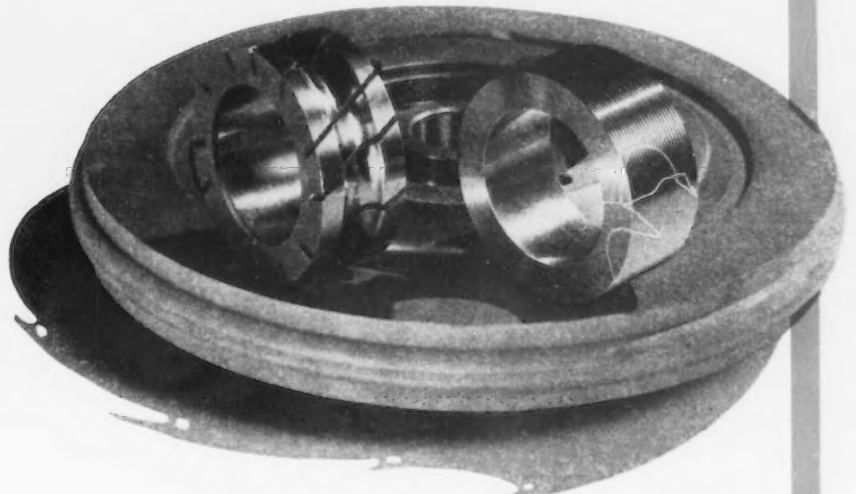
A properly formed fine grit wheel, 14 in. diam with a face width of $1\frac{1}{4}$ in. The form is a dual ball race. Crush forming solved a problem by reducing wheel dressing time from a half day to a few minutes. Two wheel forming rolls are illustrated, one with helical grooves for the deep form of the ball race, the other a shallow thread form where "gashing" is not needed.
